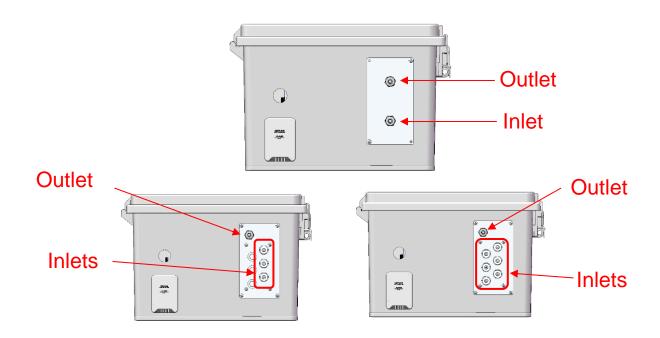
Industrial Enclosure (Bottom View of standard single-, 3-, and 6-port configurations)
